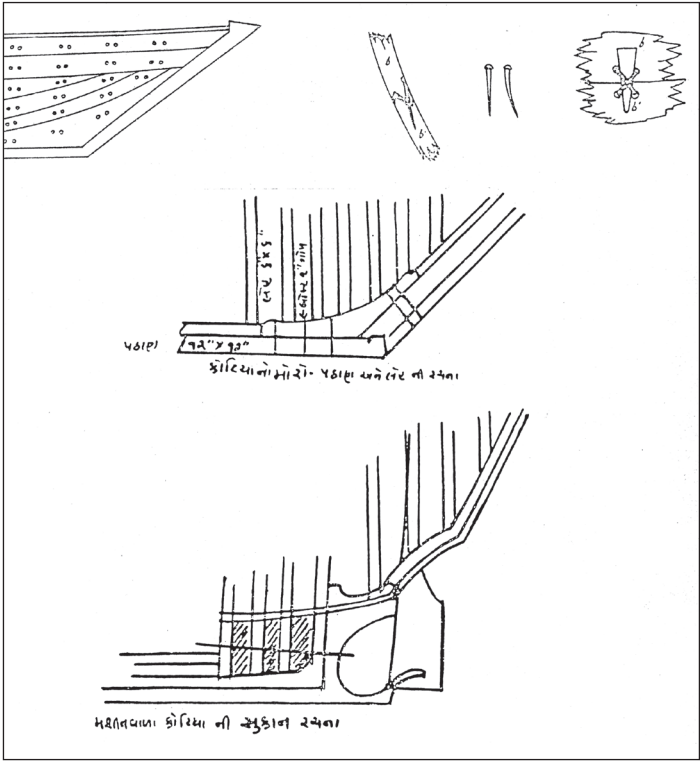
Gujarat tradition of stem and stern fixture with keel.
